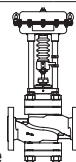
with flanges Pressure balanced plug Spring opens on air failure
